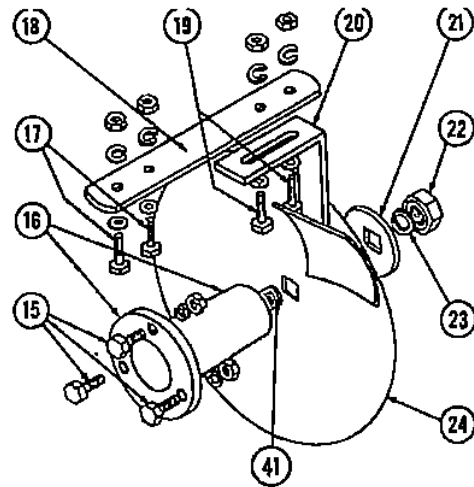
FURROW FILLER ATTACHMENT — MACH. NO. 200080
